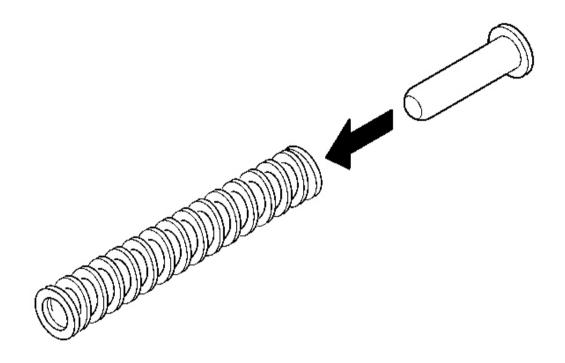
Installing Spring Guide To Tilt Spring Courtesy of GENERAL MOTORS CORP.
